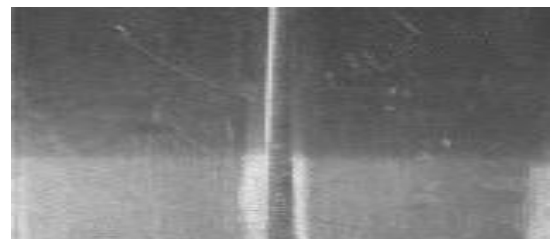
Friction Stir welding specimen (FSW)
